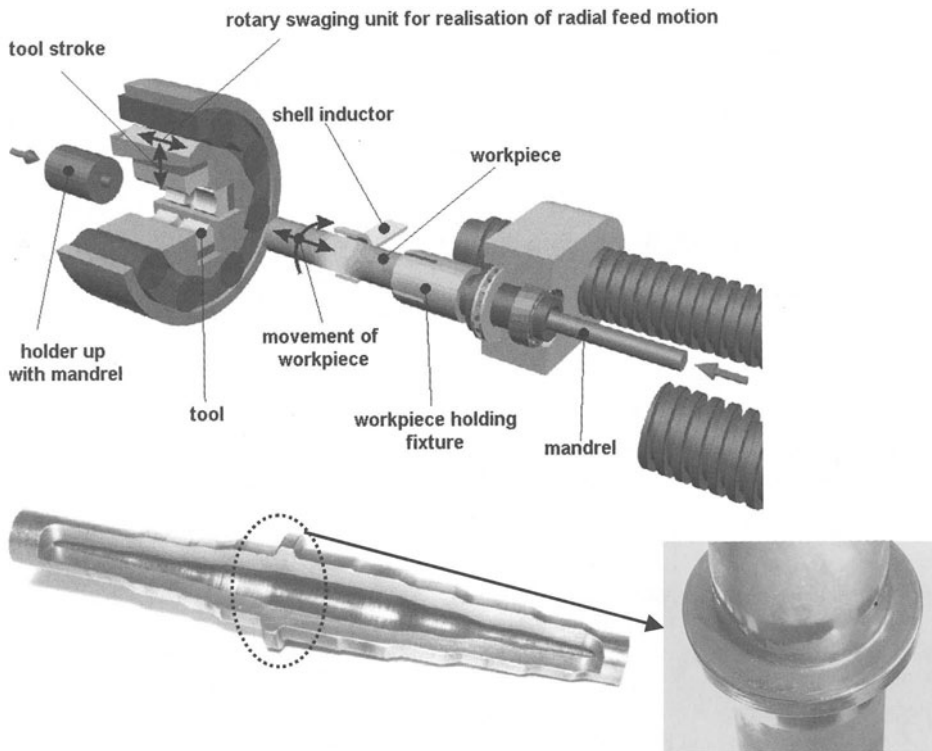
Schematic tool set-up for the Axial-Radial-Forming process (top), hollow shaft (middle) and manufactured shaft collar
